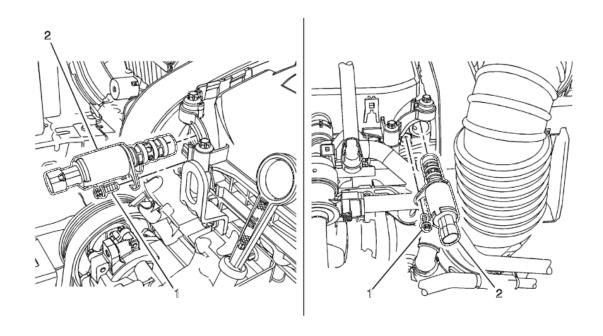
Camshaft Position Actuator Solenoid Valve & Bolt Courtesy of GENERAL MOTORS COMPANY
